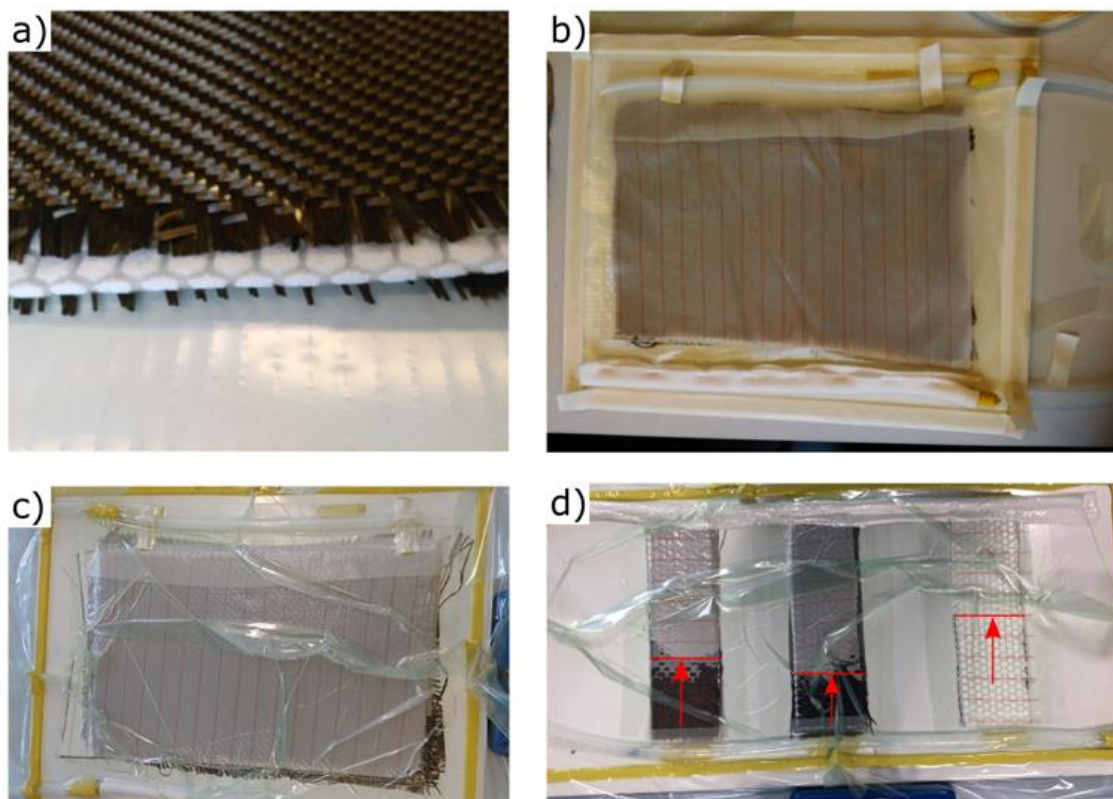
Scheme of the manufacturing process of basalt/flax/sandwich composites by vacuum-assisted resin infusion moulding (VARIM) with the nonwoven core as infusion media. a) stacking configuration, b) placement of resin inlet and outlet tubes, c) sealing process and vacuum test procedure, d) resin infusion process with different stacking sequences.
